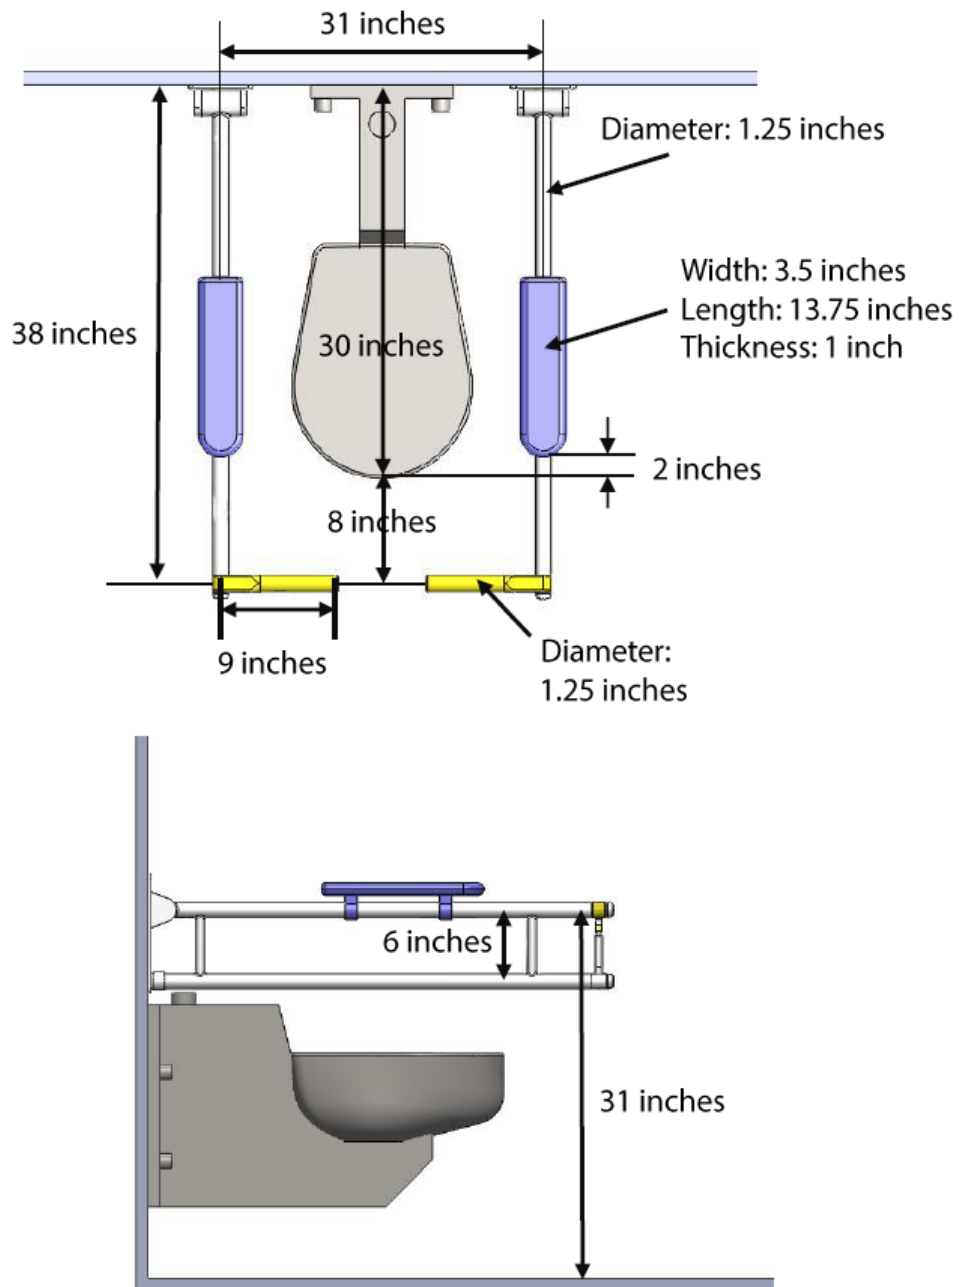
is the first concept generated based on the prototype. In this concept, instead of mounting the short handle on an existing grab bar through a connector, the short handles are directly assembled to the end of the top bar. The mechanism of the short handles is exactly the same as that used in the prototype. The armrest in this concept (Figure 7.2) has the same size as the concave armrest except that the top surface is flat if it is made out of hard materials.
